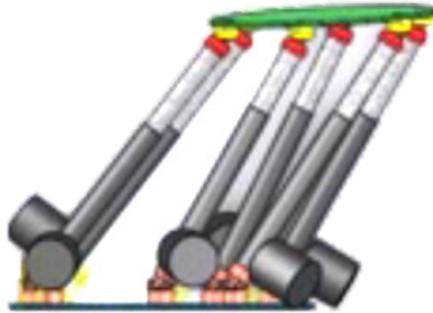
a. Motion of top plate of machining bed in x-axis.
